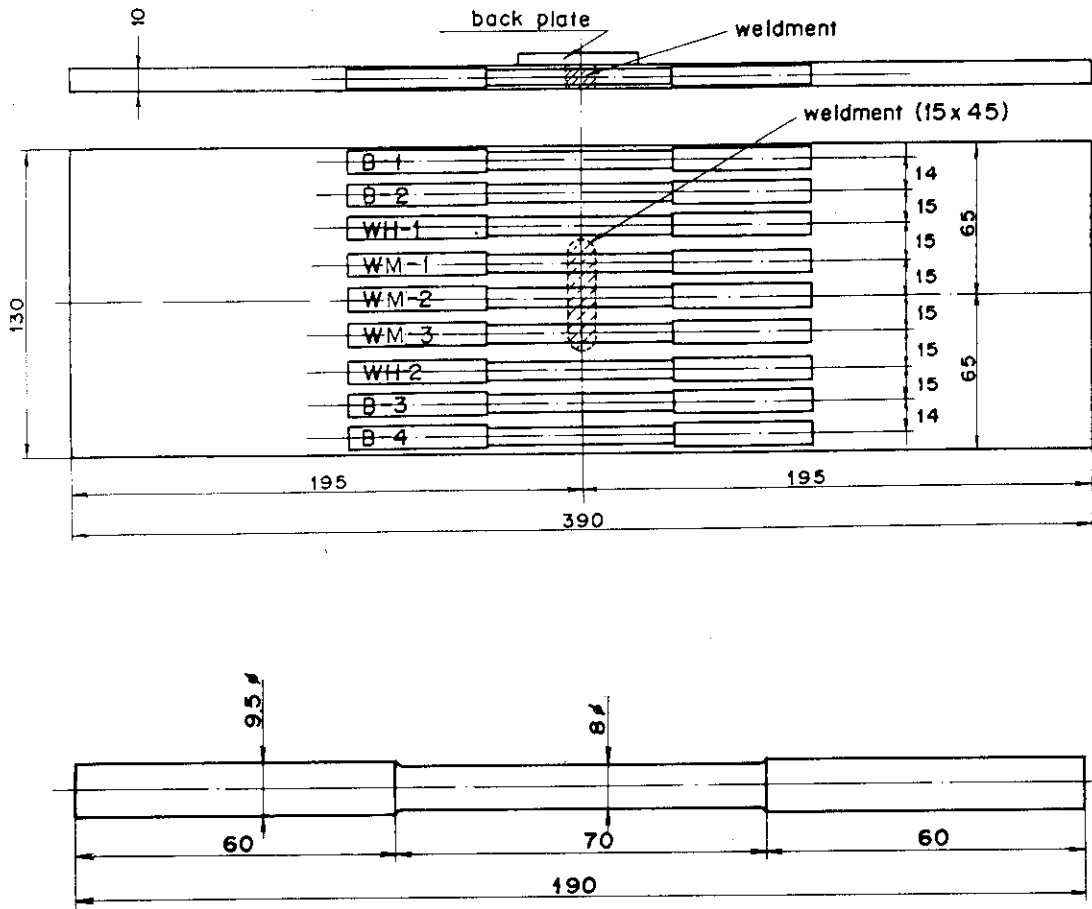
Cutting diagram of tensile specimens from the welded plate and specimen geometry
